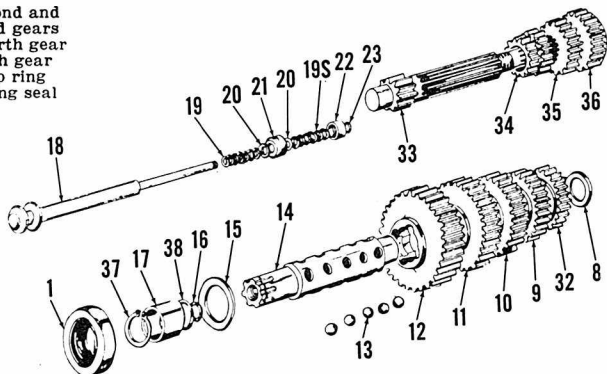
Exploded view of five speed close ratio transmission gears. On wide ratio transmission, first and second gears are part of cluster shaft (33) and other three gears are pressed on and not splined.
